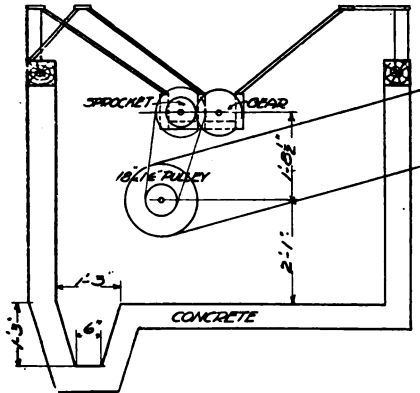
SIDE ELEVATION BELT CONVEYOR
